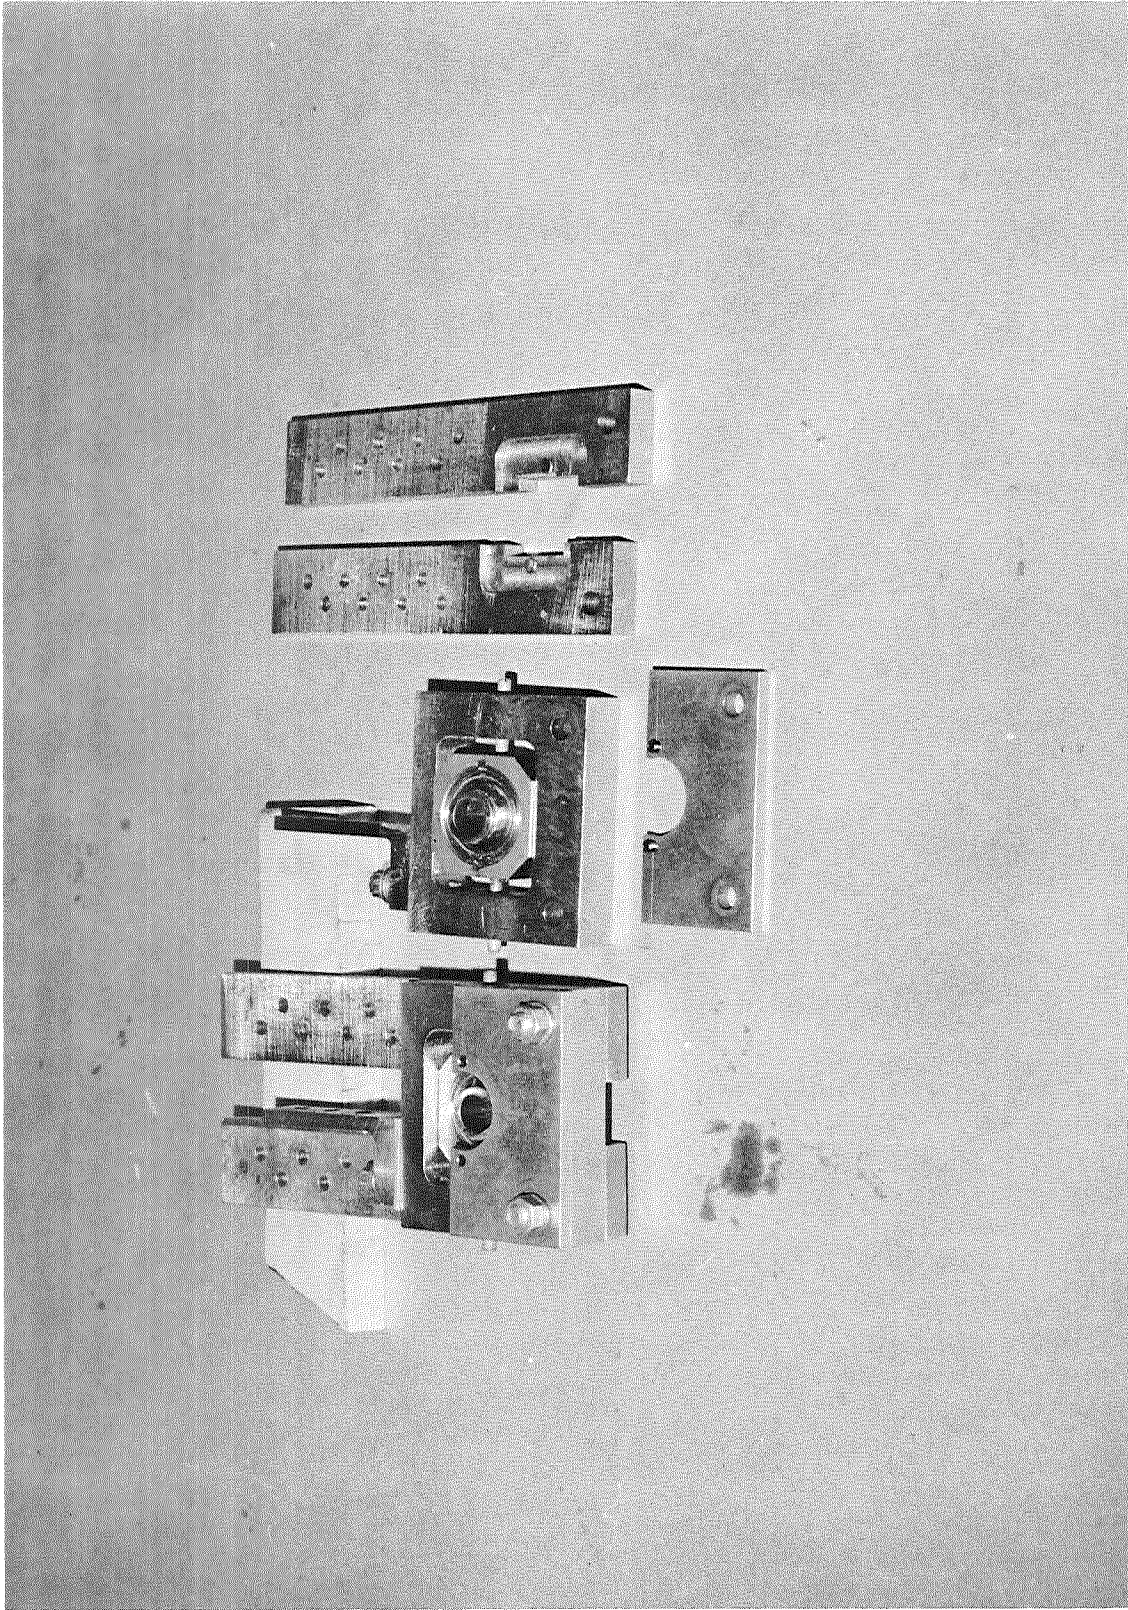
TENSION AND FATIGUE TEST FIXTURE.
